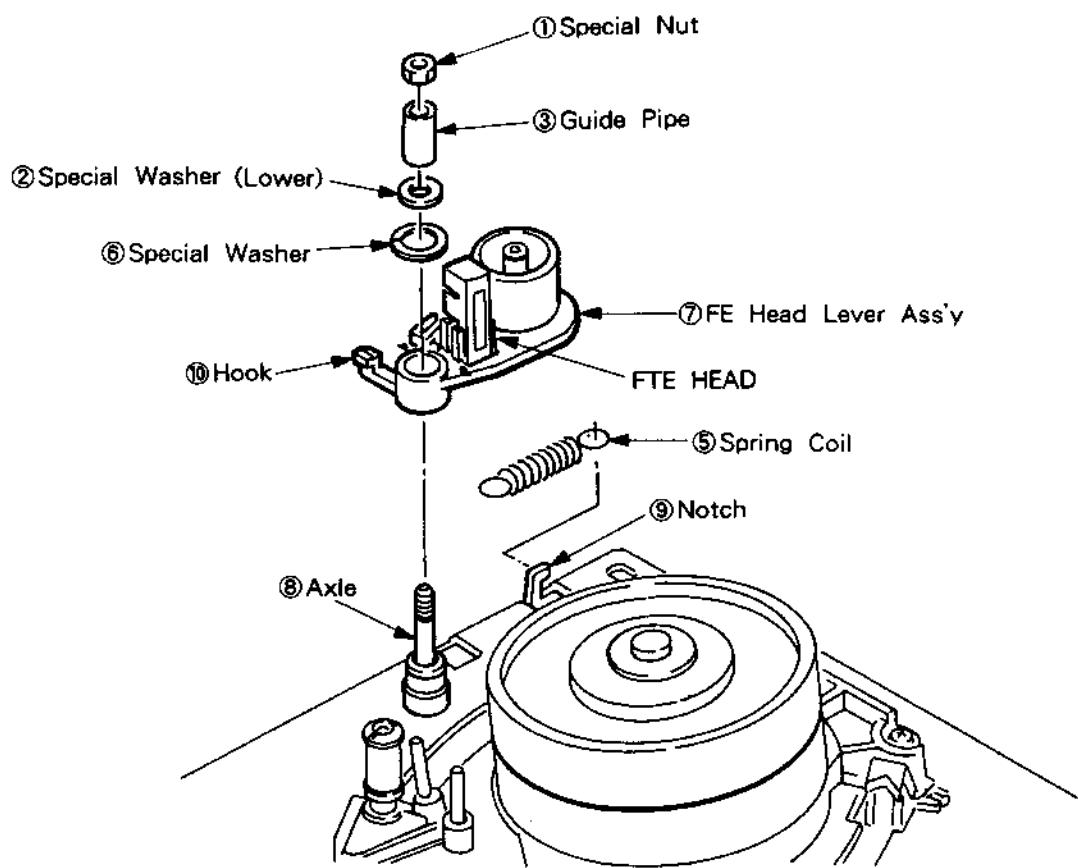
Fixed Guide (S) & FE Lever Ass'y
